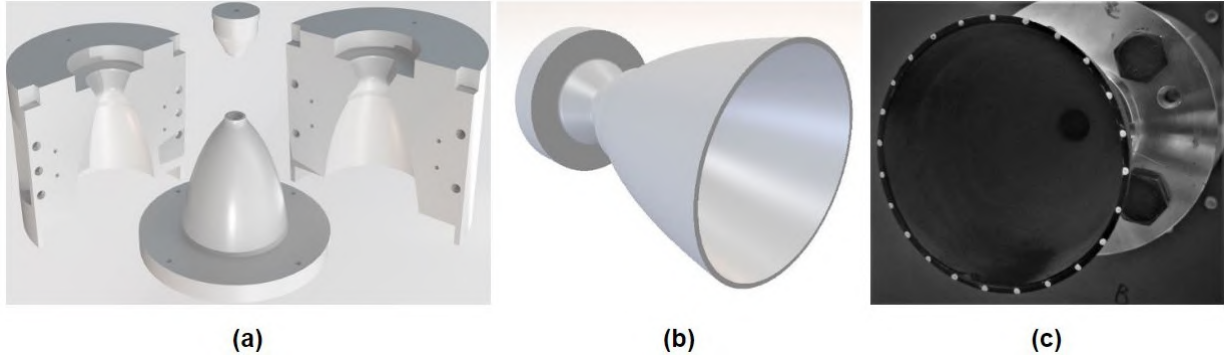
a) Exploded view of the mould assembly b) Compliant nozzle design rendering c) Detail of fiducial markers on compliant nozzle lip surface
